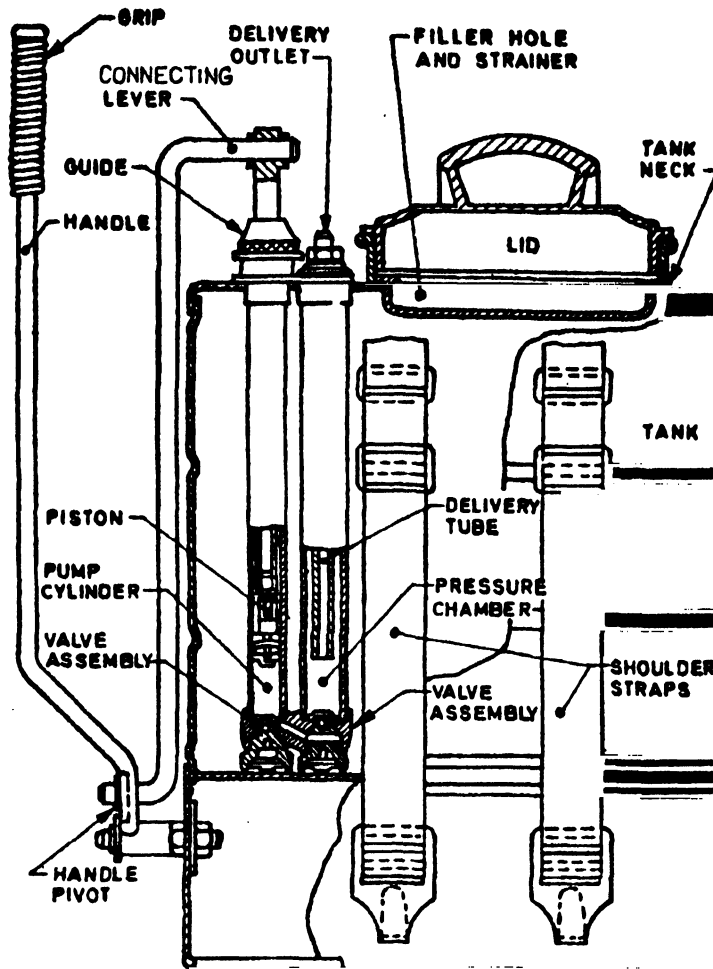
KNAPSACK SPRAYER, PUMP ASSEMBLY INSIDE TANK
